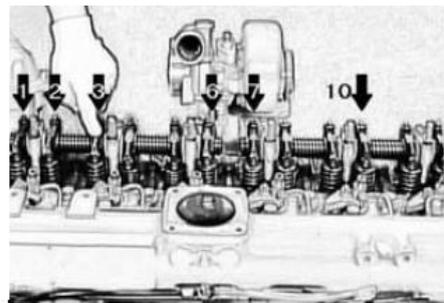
Valve Clearances Adjustment for Six-cylinder Engine
